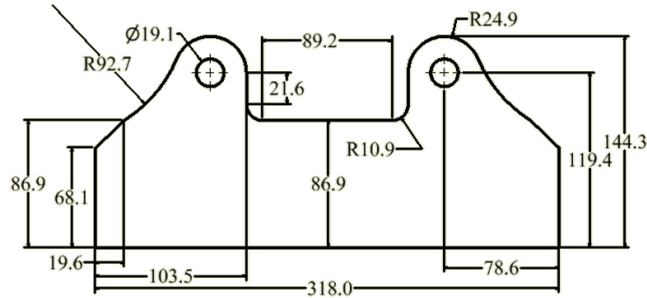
Dimensions of the Aluminum 2024-T351 Lug Joint (mm).
